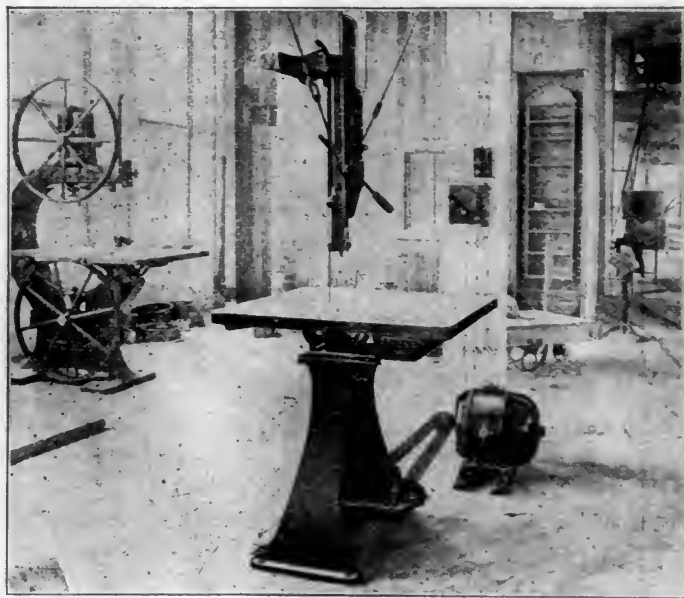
BELTED DRIVE FOR A JIG SAW FROM A 1-H. P. SLOW-SPEED MOTOR.
